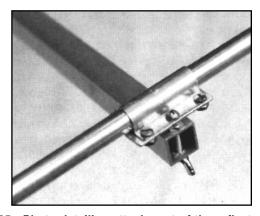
Photo detailing attachment of the reflector to the square-section boom, using two #10 bolts and wingnuts.
